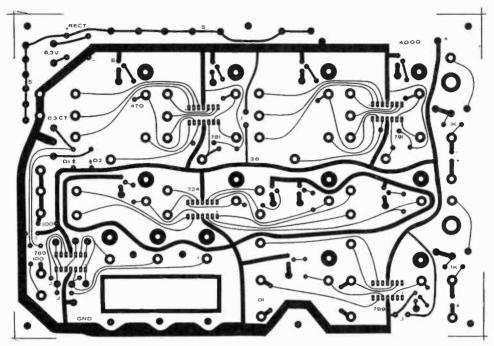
Foil pattern etching guide is shown here half-size. The best method of obtaining a full-size guide is to use photographic blow-up. However, board is available from the source specified in Parts List if you prefer not to make your own.
